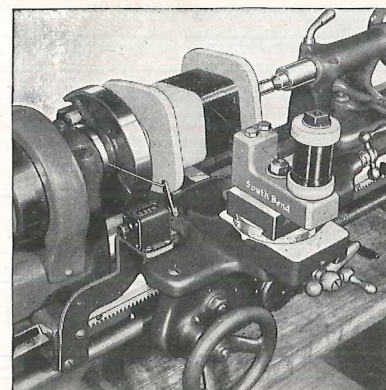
shows a transformer coil being wound on the lathe. Each turn is recorded on a counter shown at left in the illustration.
